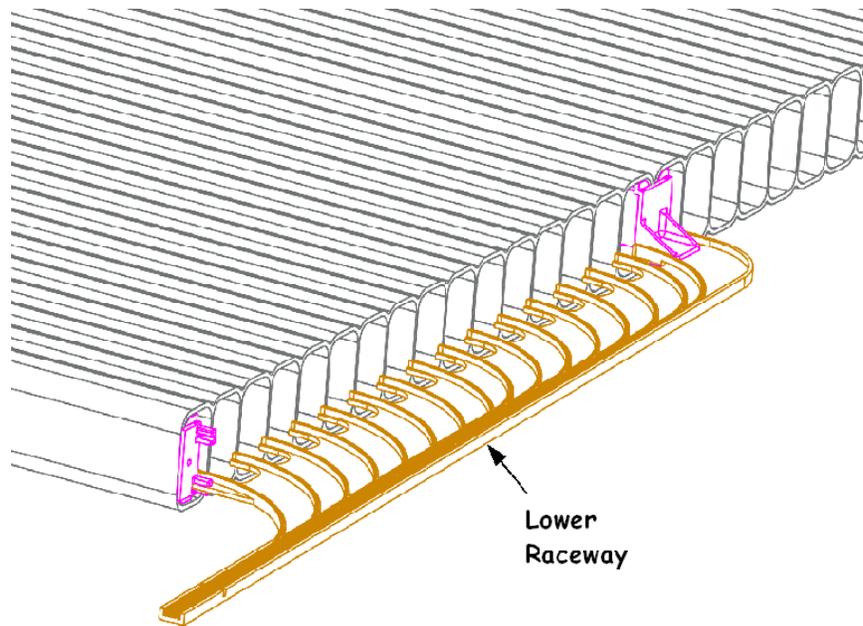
Attachment of the lower fiber raceway to the module. This part snaps onto the center and side seals and references the center of the extrusion assembly through its connection to the center seal.
